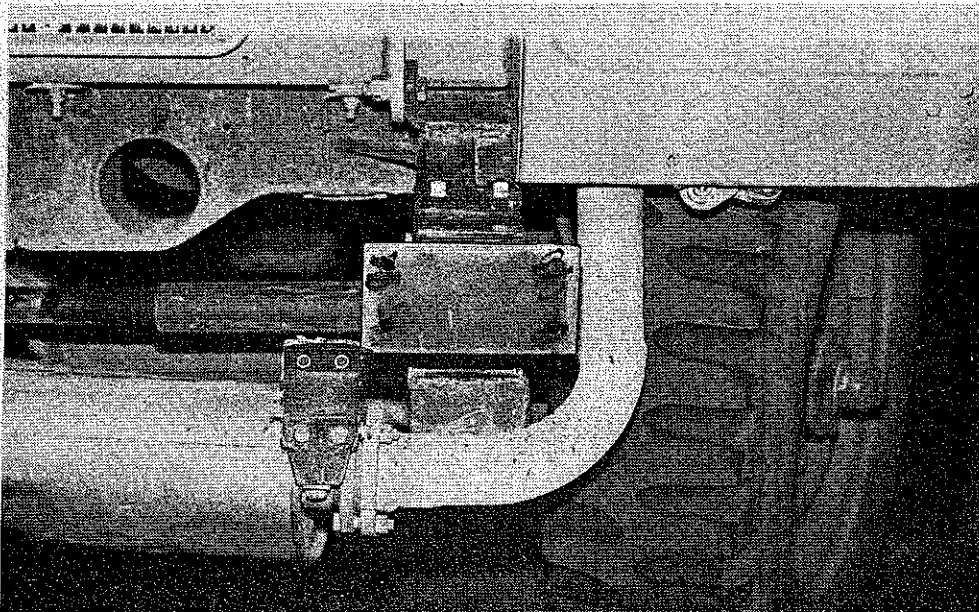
REINFORCEMENT PLATE CORRECTLY POSITIONED ON THE END OF THE LH BUMPER BAR MOUNTING BRACKET
